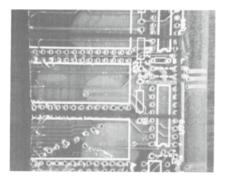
Four layer circuit board used, component side up. Inspection area indicated.
